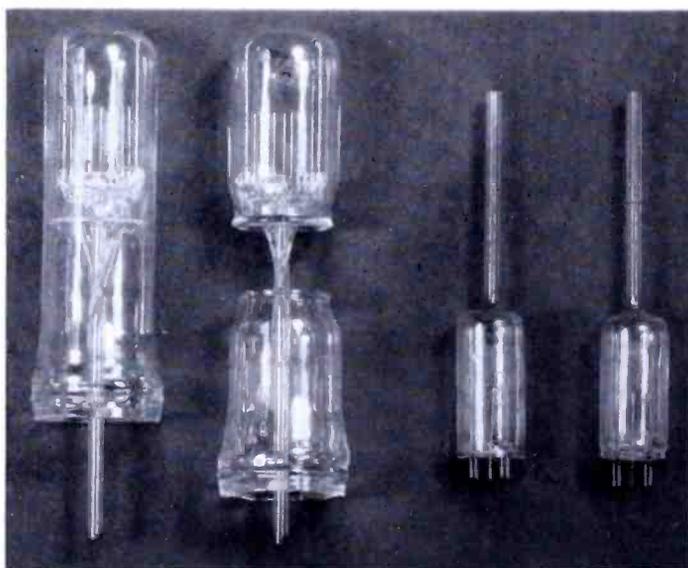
(Left Half)—Conventional type tube before and after sealing, with discarded collet.
